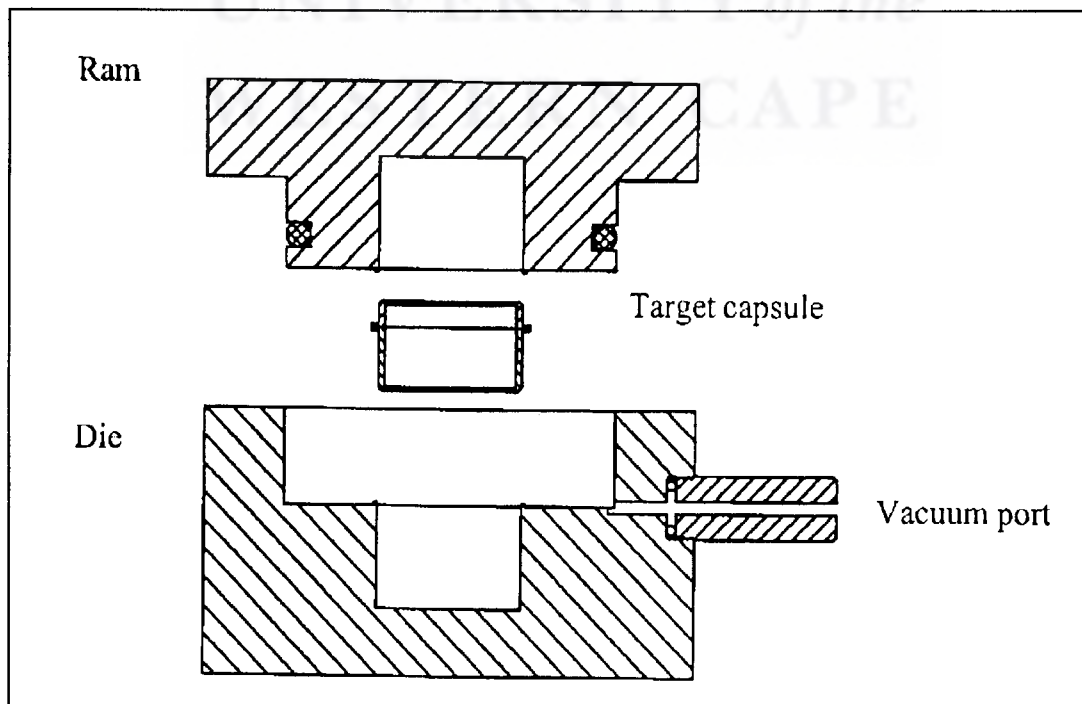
Schematic representation of the cold-pressure-welding tool.
